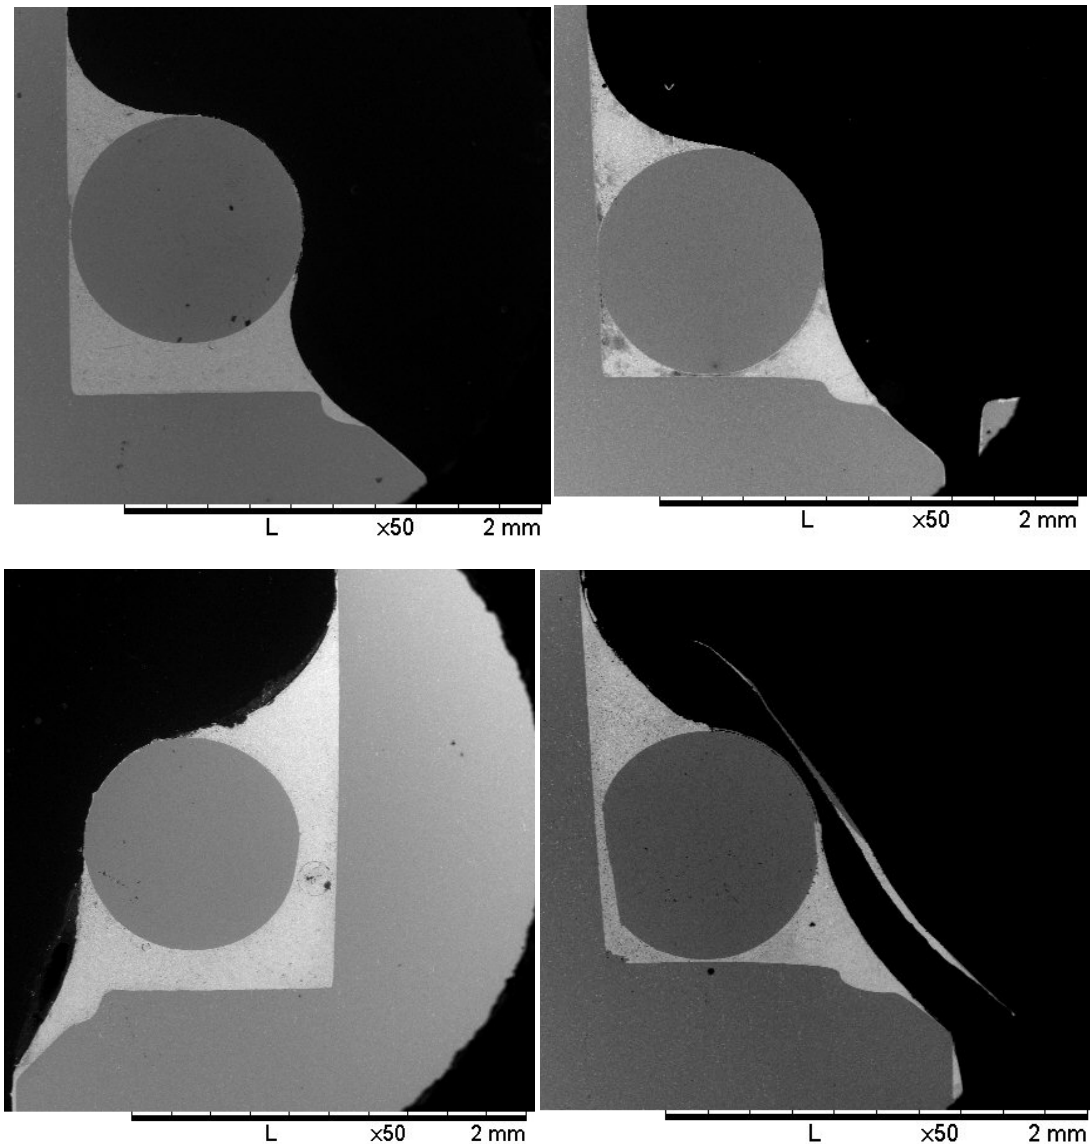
SEM images of solder cross-sections on (*top left*) board 1, (*top right*) board 2, (*bottom left*) board 3 and (*bottom right*) board 4
